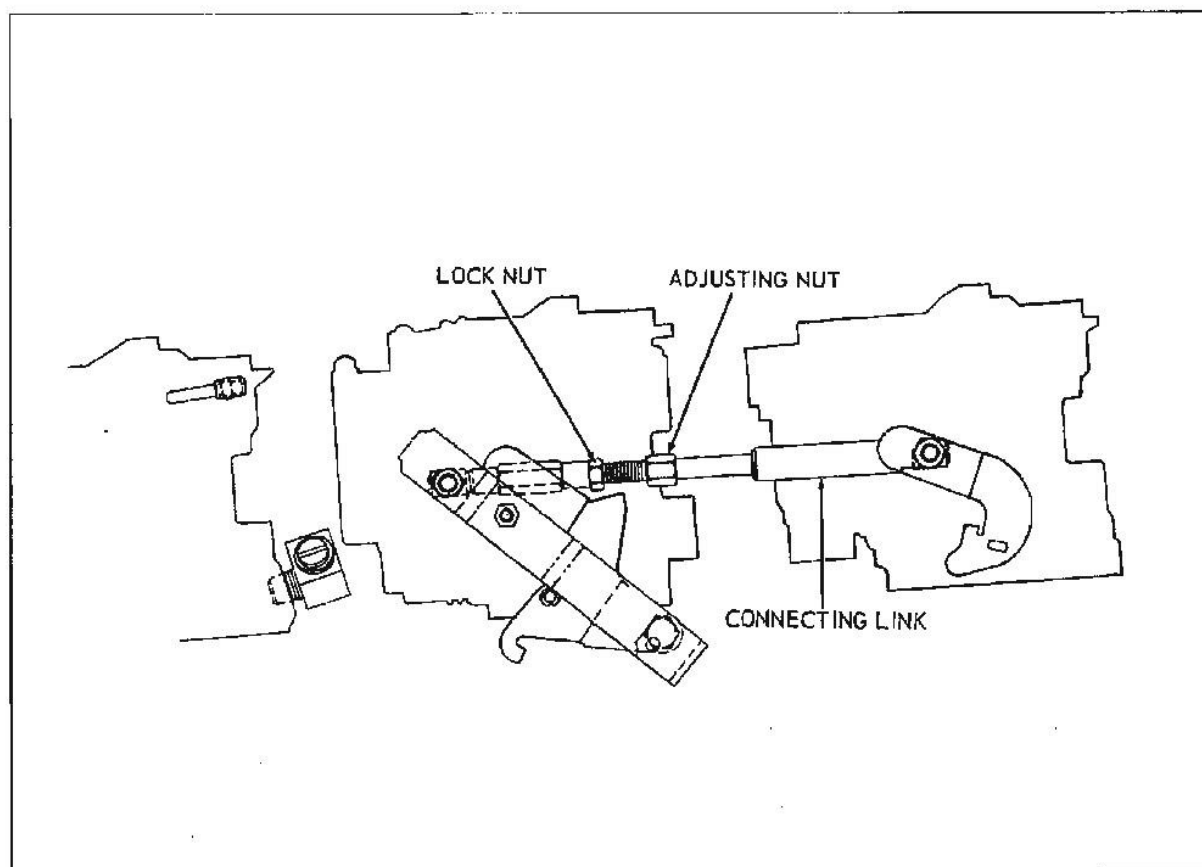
B-101 Mechanical Throttle Linkage - Tri-Power Synchro-mesh
